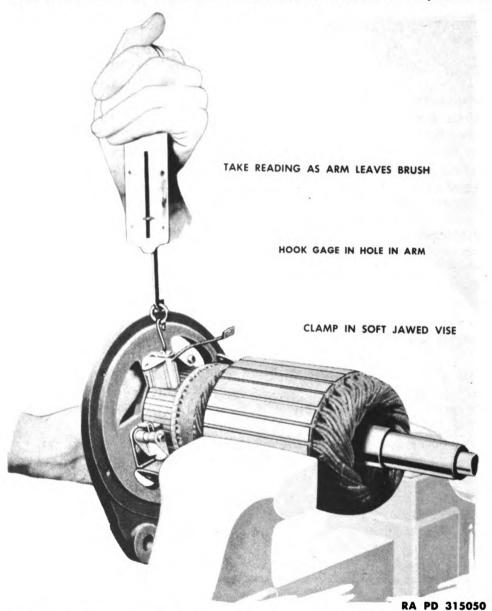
Measuring Brush Spring Tension on GDJ, GFR, and GFZ-type Generators with Tension Gage (41-G-105)
